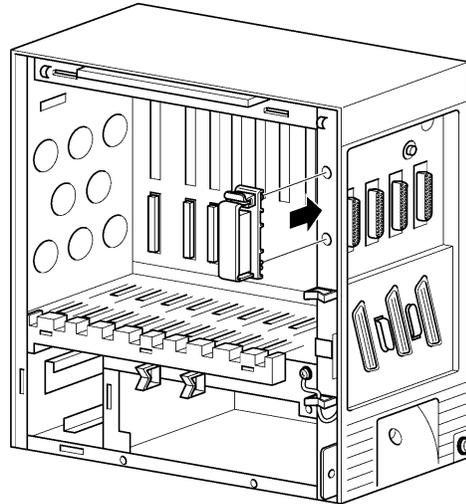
Mounting the Cable Clamp on the KSU Frame
